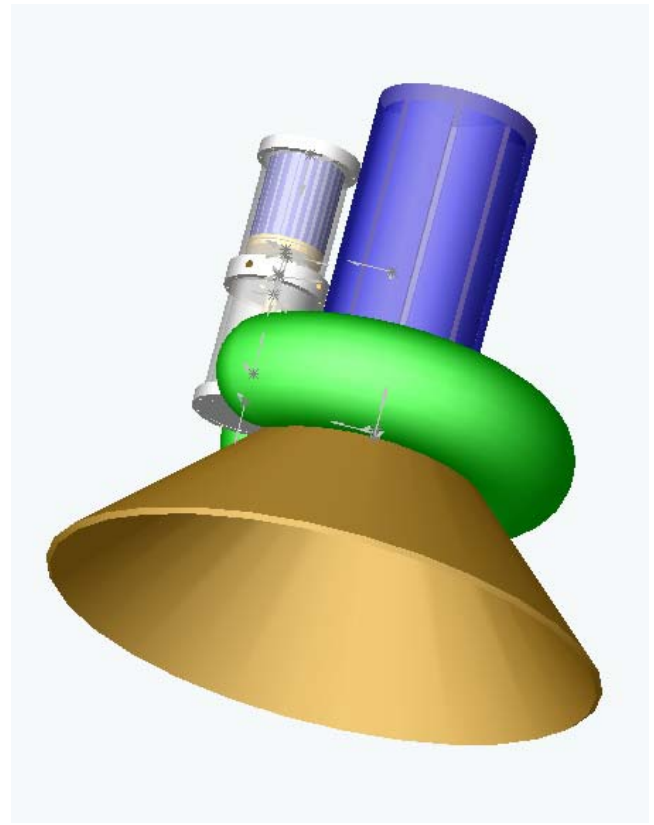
New design for seafloor imploder – Tan: funnel imploding chamber; Blue: venting tank; Green: pump-water bladder; White: four-chamber, two-piston pump assembly
